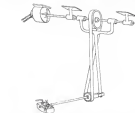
MACHINE FOR ROUGHING PROPELLERS WITH MOTOR AND BELT DRIVE. THIS MACHINE, LIKE THAT SHOWN IN FIG. 2, IS A FORM OF ROUTER AND IS MANIPULATED ENTIRELY BY HAND. THE SECOND DRIVING MECHANISM IS THE SHAFT OF THE DRIVEN.
